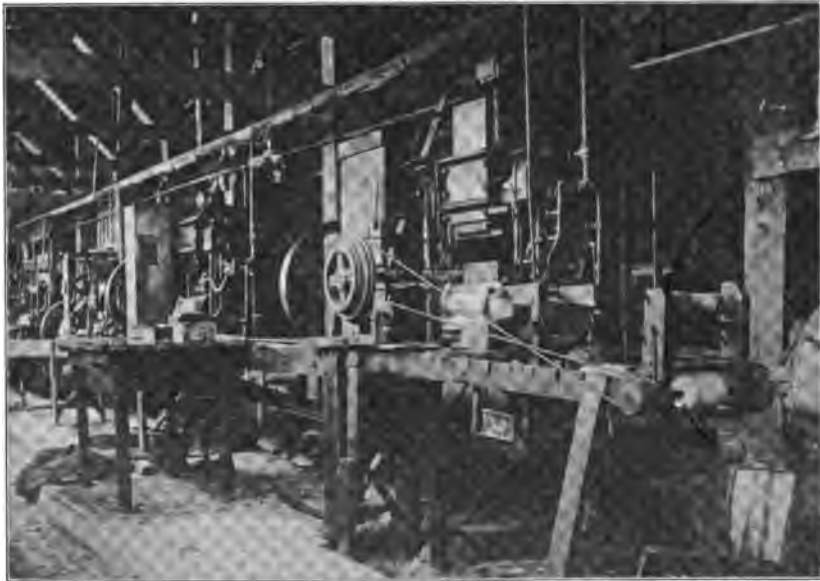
Home-made Reel Cutter for Cutting Blanks. Ludowici-Celadon Co., Alfred, N. Y.
